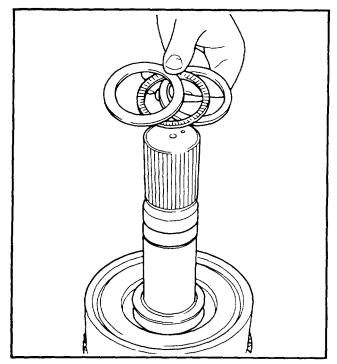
Rear thrust needle bearing and thrust races removed.
